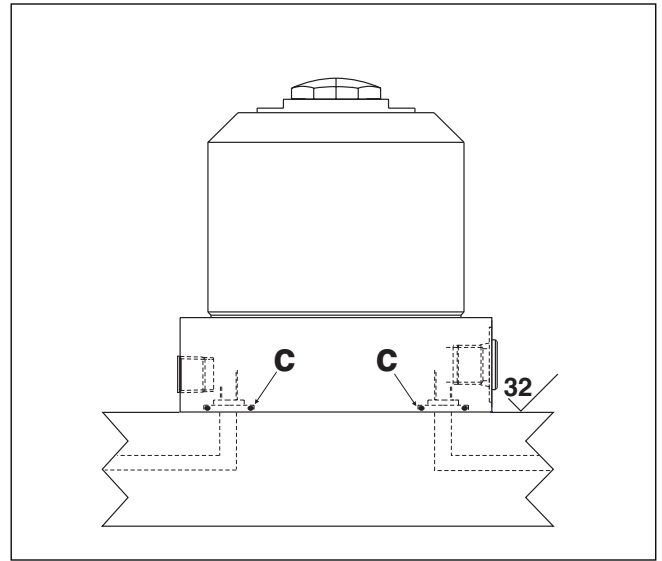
"Air Purge" / "Air Spring" work support using manifold breather port
